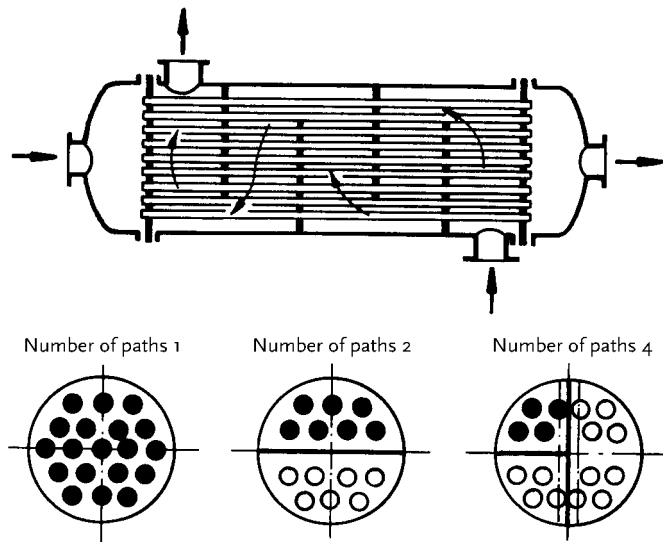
Tubular heat exchanger with straight pipes and fixed boiler tubes [5.8]
